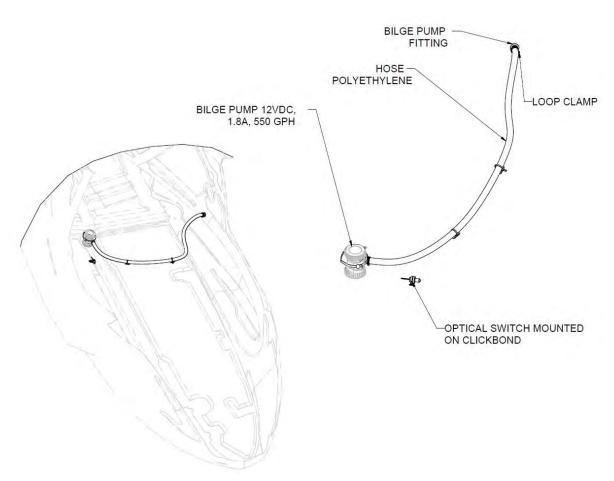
BILGE PUMP INSTALLATION AND OUTLET ROUTING.
